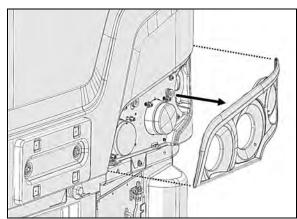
HEADLAMP ASSEMBLY BEZEL
